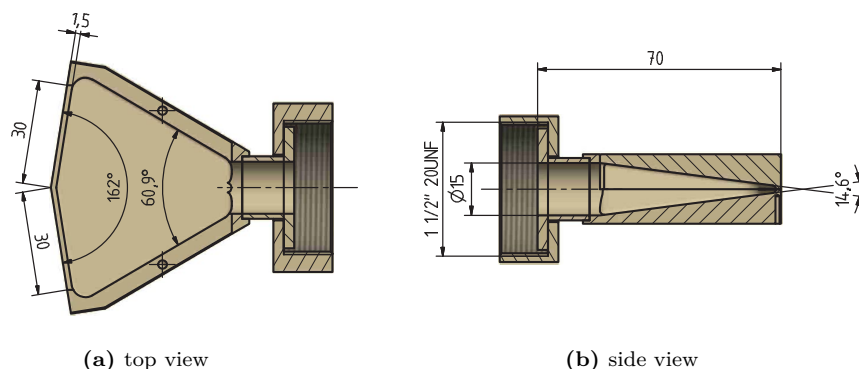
Technical drawing of the conical V-nozzle.⁶³
